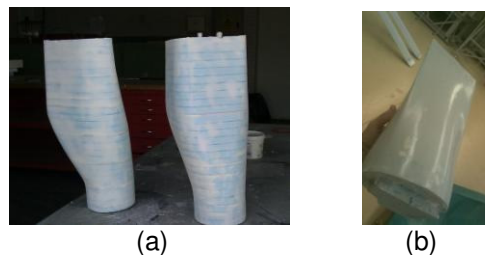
Intake and exhaust moulds: (a) intake moulds; (b) exhaust mould.
